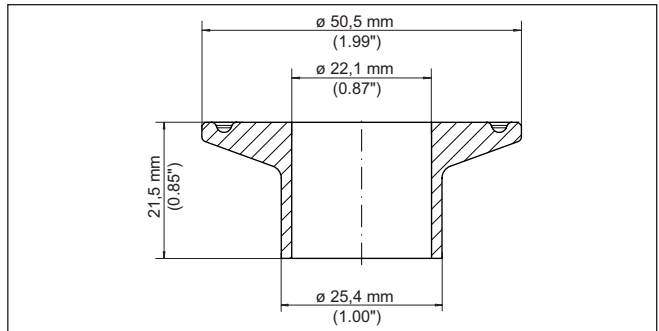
Dimensions of welded socket, Clamp 1" (DIN 32676, ISO 2852)
